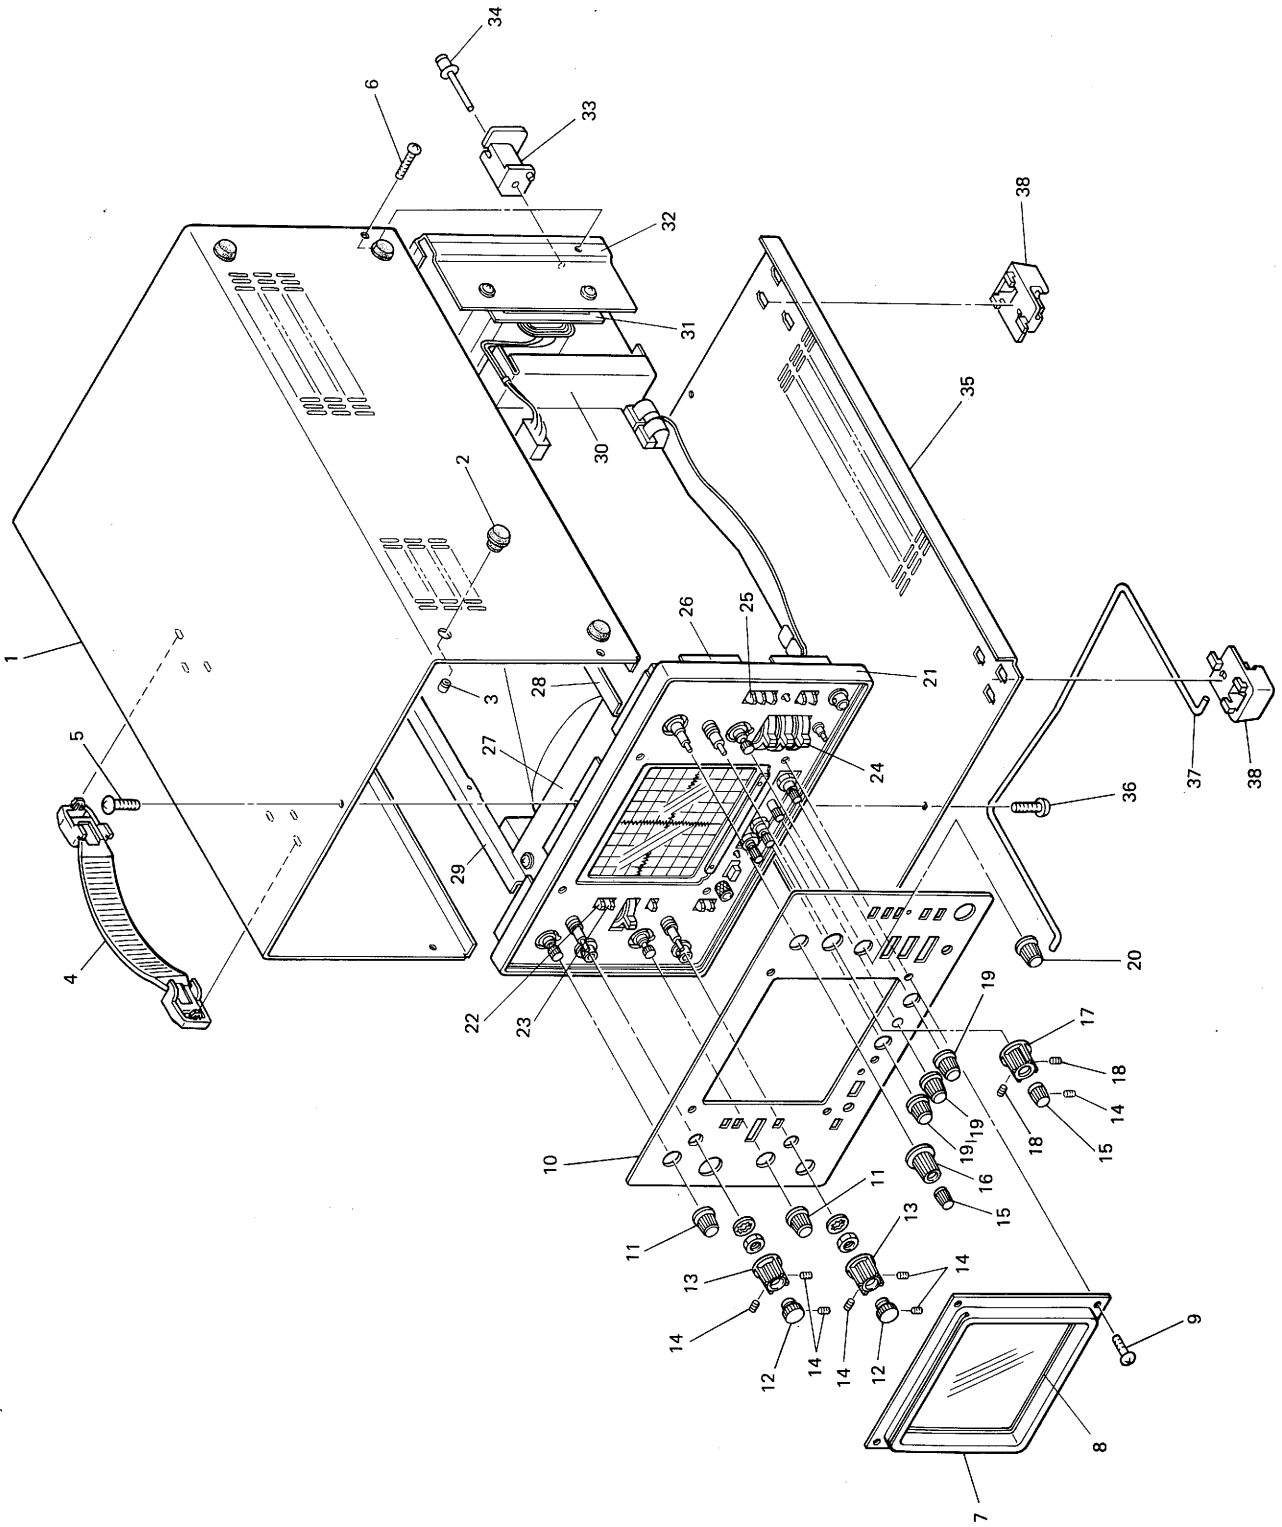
Mechanical Drawing (SS-5702A/5703A)
